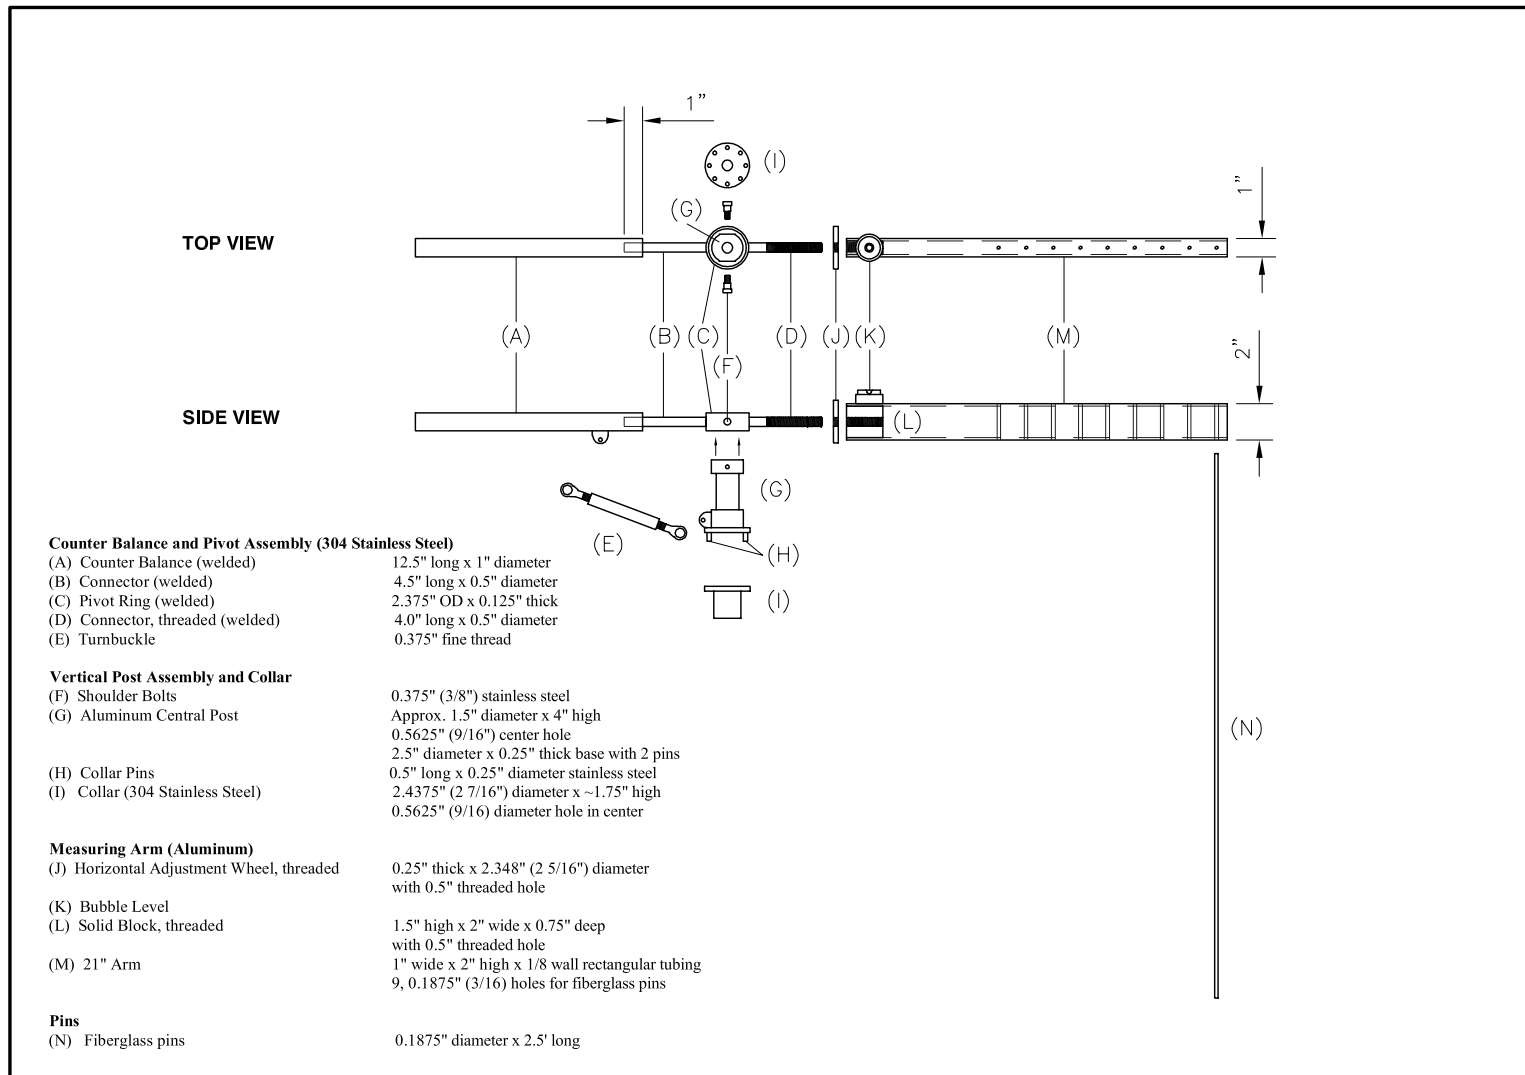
Construction drawing of a surface elevation table used on a 9/16" benchmark rod (Source: Cahoon et al. 2002b).
